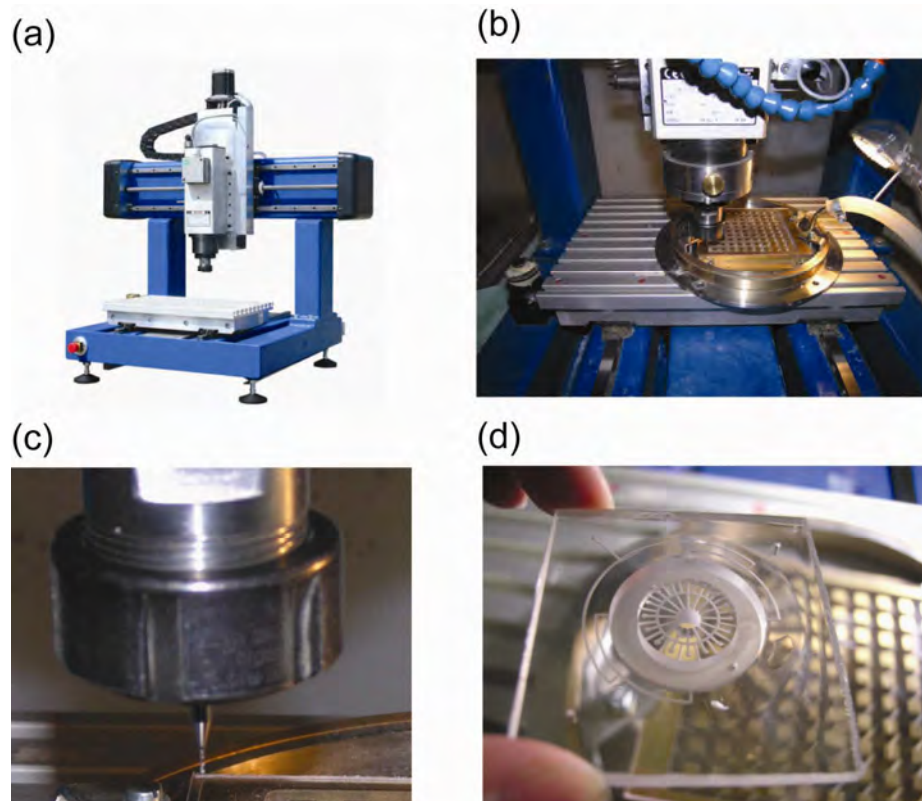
(a) The CNC milling machine (ErgWind), (b) milling machine at work, preparing device in polycarbonate, (c) to prepare microfluidic channels a mill with a diameter 100  $\mu\text{m}$  used, (d) microfluidic device milled in polycarbonate.
